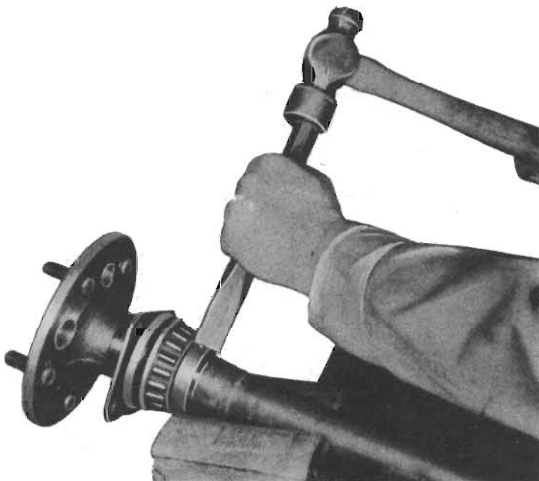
Loosening the bearing retainer collar prior to removal.
